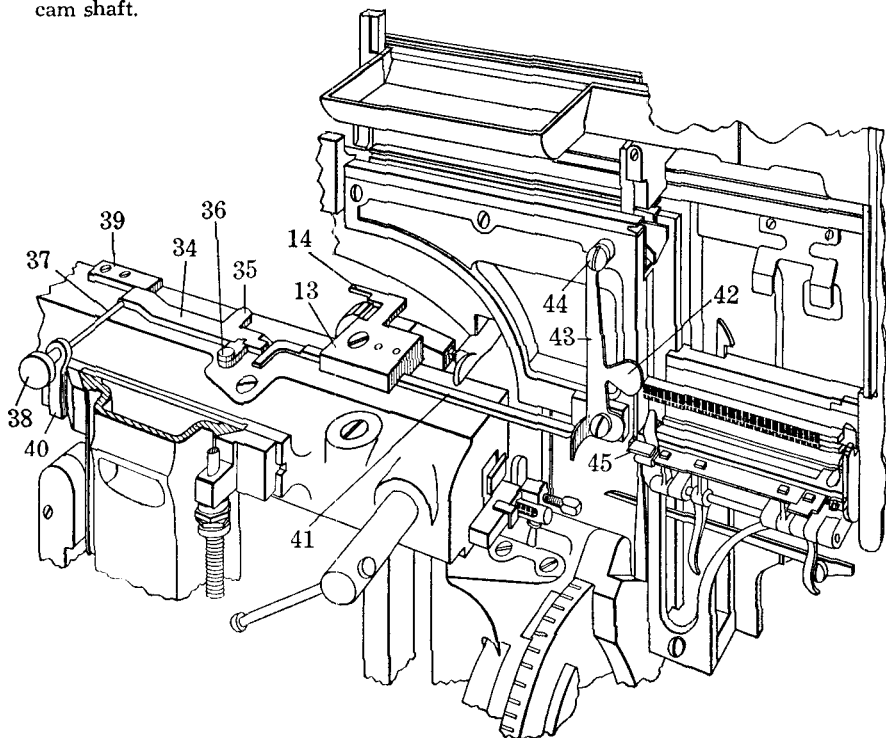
View of simple two-letter attachment. In this view 34 is the main section of the filling piece on which 35 is the portion which is placed under the center screw in the top of the first elevator slide, and 36 is the filling piece over the vise automatic rod. The filling piece 36 is hinged to the main piece 34 so as to allow it a vertical movement. The unit comprising 34, 35 and 36 can be easily thrown over to the left, out of use, because the main section is pinned to a rod 37 which has on its end knob 38, and has bearings in blocks 39 and 40. The slide 41 is merely a distance piece, the right-hand end of which serves to hold the auxiliary line safety lever 43 hinged at 44 from being moved to the left in case the projection 42 on it is contacted by the projection 45 on the duplex rail of the assembling elevator. Because the matrices must always be assembled on the lower rail of the assembling elevator when the simple two-letter attachment is in use, the duplex rail should be out, and this safety prevents raising the assembling elevator if this rail is not out.
